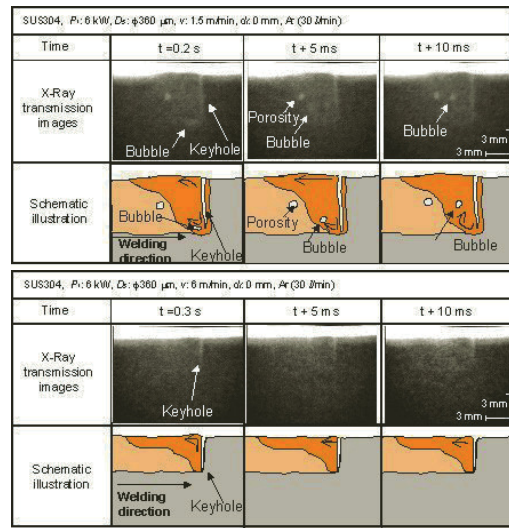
X-ray transmission observation results and schematic representation of keyhole behaviour, melt flows, bubble formation and molten pool geometry during welding with 6 kW fiber laser at speeds of 1.5 and 6 m/min
